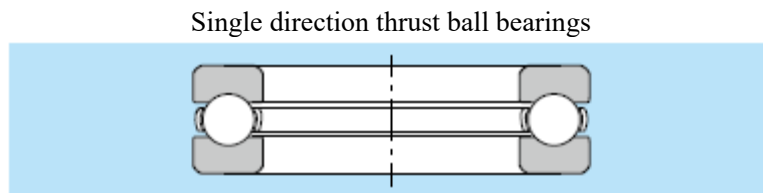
Single direction thrust ball bearing (example of pressed cage)
